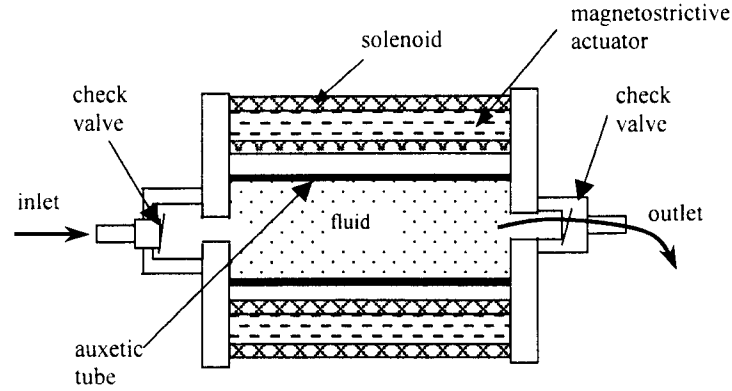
Cross section of a solid-state pump using auxetic tube and magnetostrictive drive elements.
